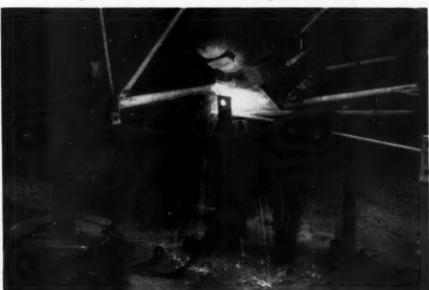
Fume Extractor in Use When Welding Galvanized Tubing
